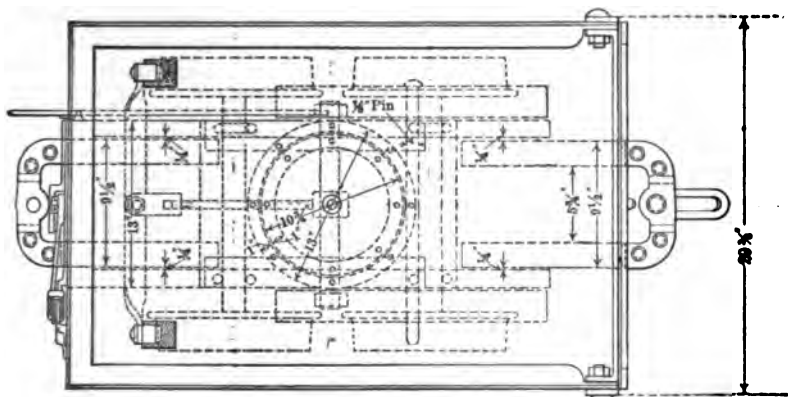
Tunnel car used in Laramie-Poudre Tunnel, plan.
